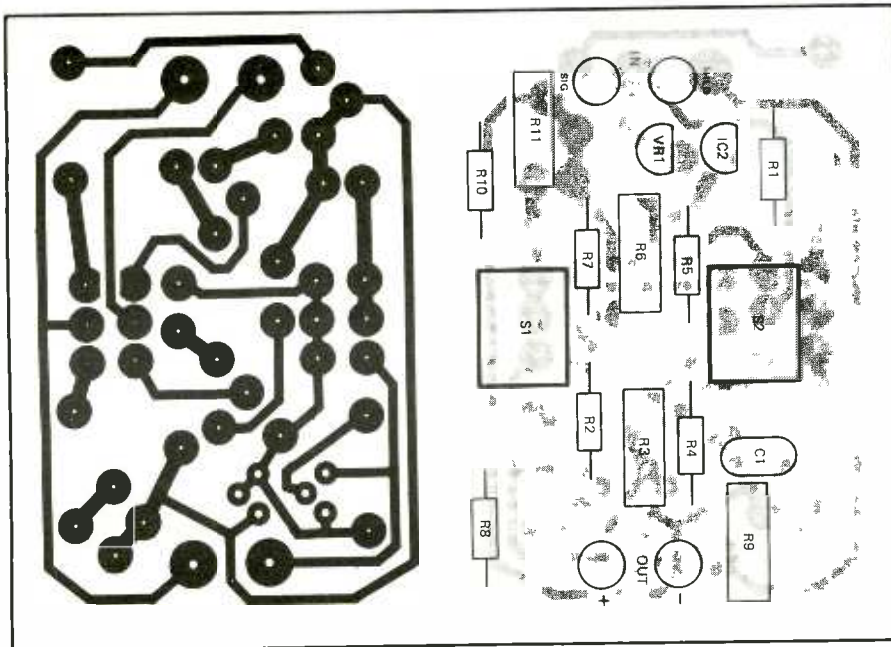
Fabricate the printed-circuit board for the project using the actual-size etching-and-drilling guide at left. Install the components on the board exactly as shown in the placement/orientation diagram shown at right.
